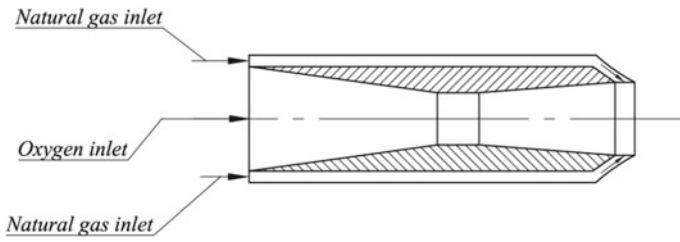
Design of the SMS DEMAG gas-oxygen burner for arc steel furnaces
